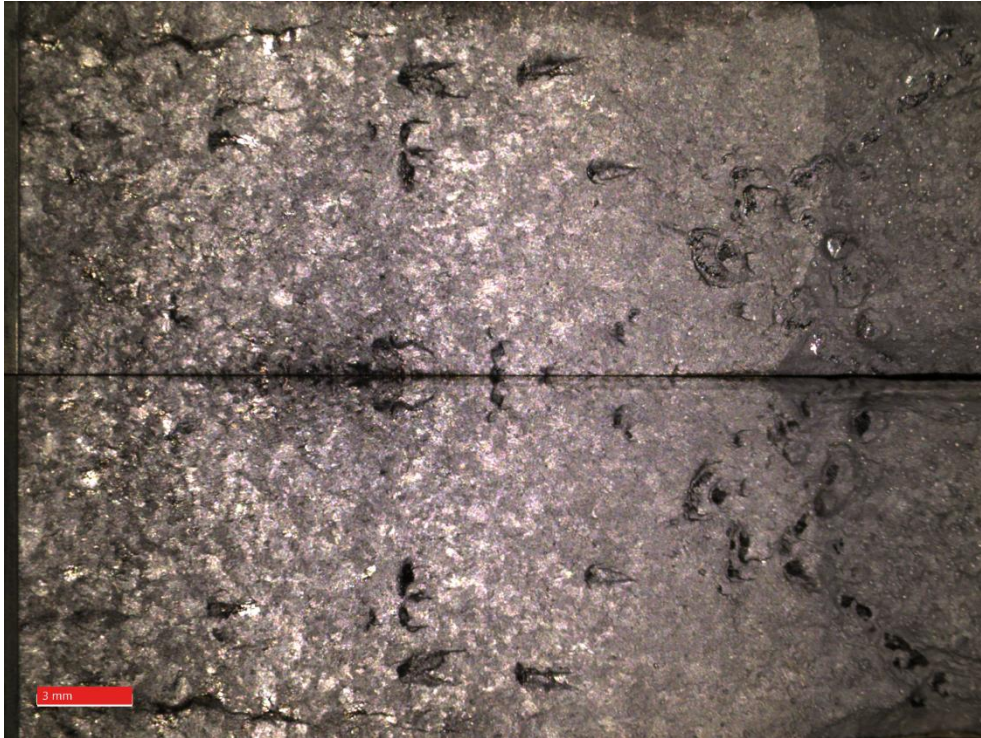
Fracture surface of 30 angle built specimen.
